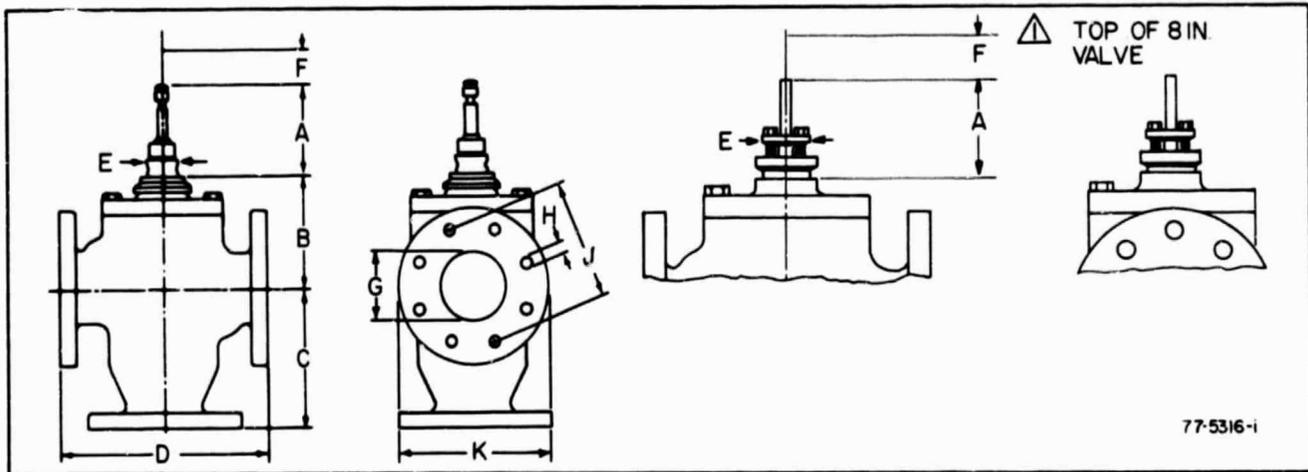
V5013B-E FLANGED BODY DIMENSIONS (REFER TO TABLE 2 & 3)
